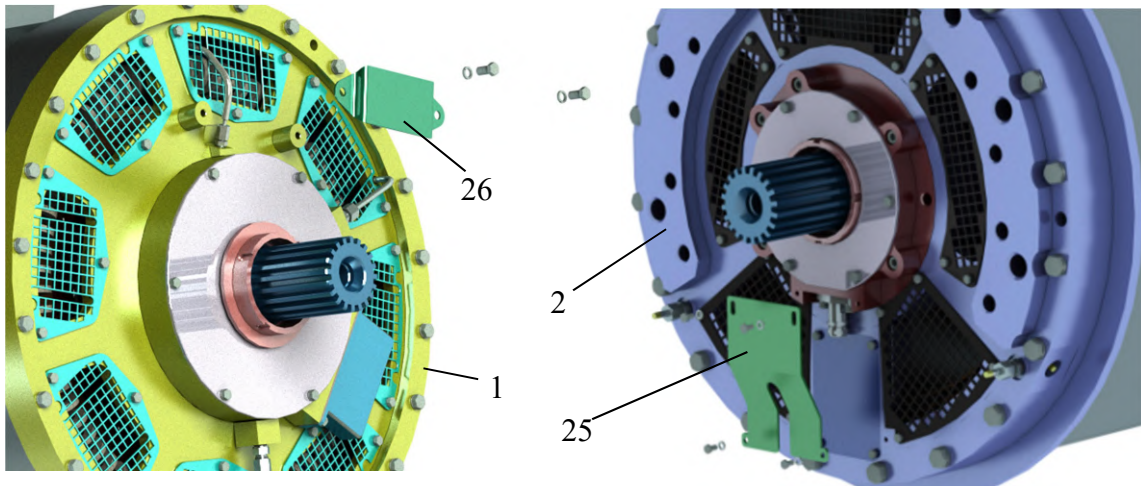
Dismantling of the Bearing Speed and Temperature Sensor Cover
